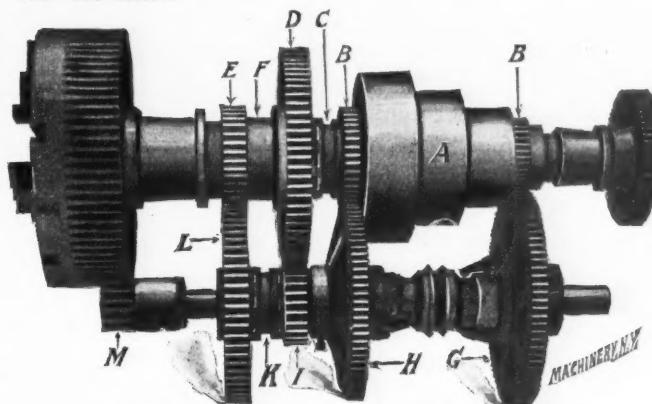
Lathe Spindle, Cone, Chuck and Driving Gearing.
